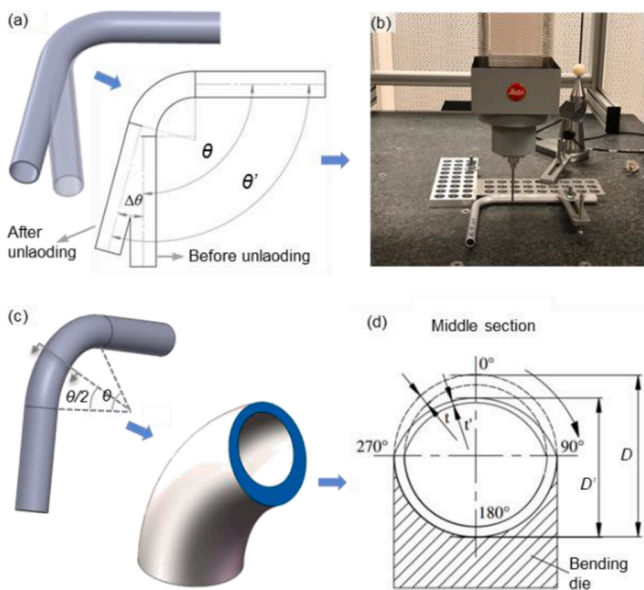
Measurement of geometrical dimension: (a) springback angle; (b) CMM for springback measurement; (c) cross-section of bent tube; (d) wall thinning-thickening and ovalization.
